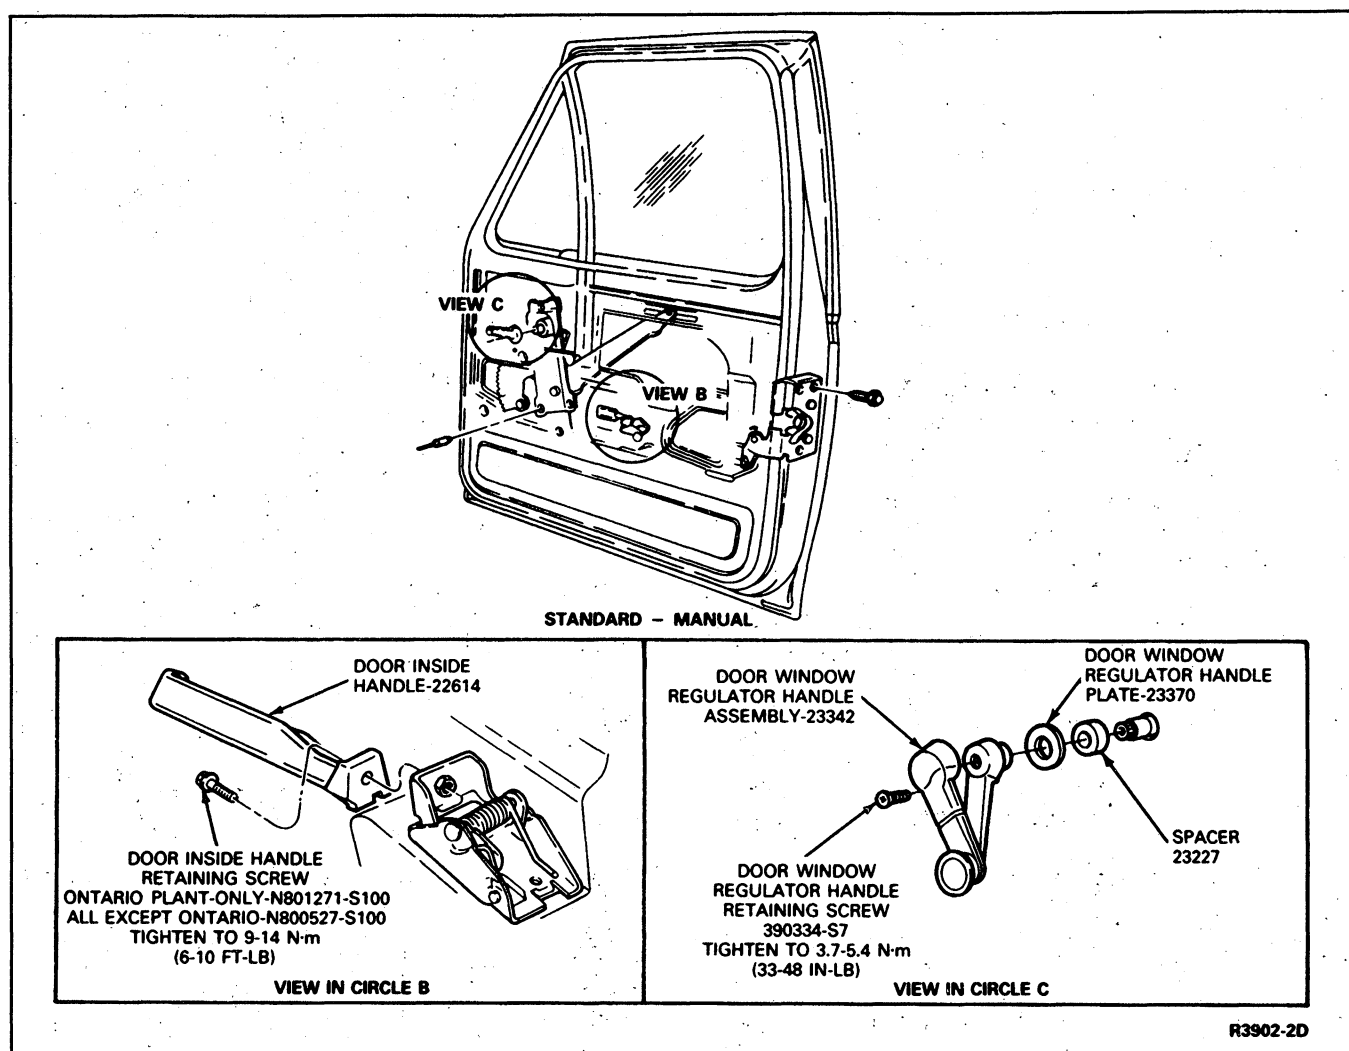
Door Window Regulator and Inside Handle—F-Series, Bronco
